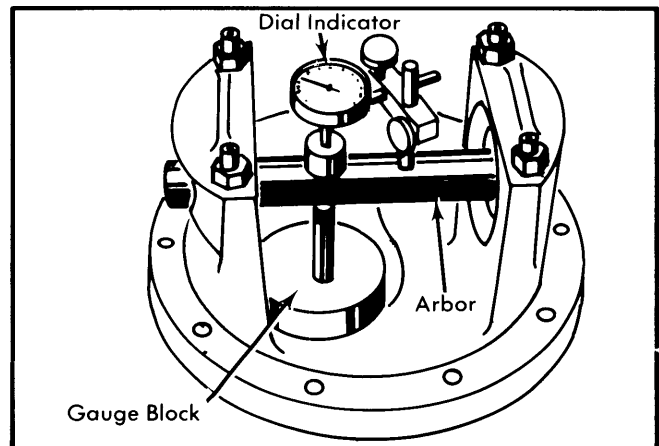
Tool Arrangement for Measuring Drive Pinion Installed Height
